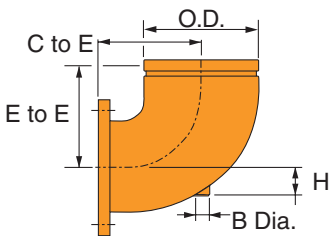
RF REDUCING BASE SUPPORT ELBOW
